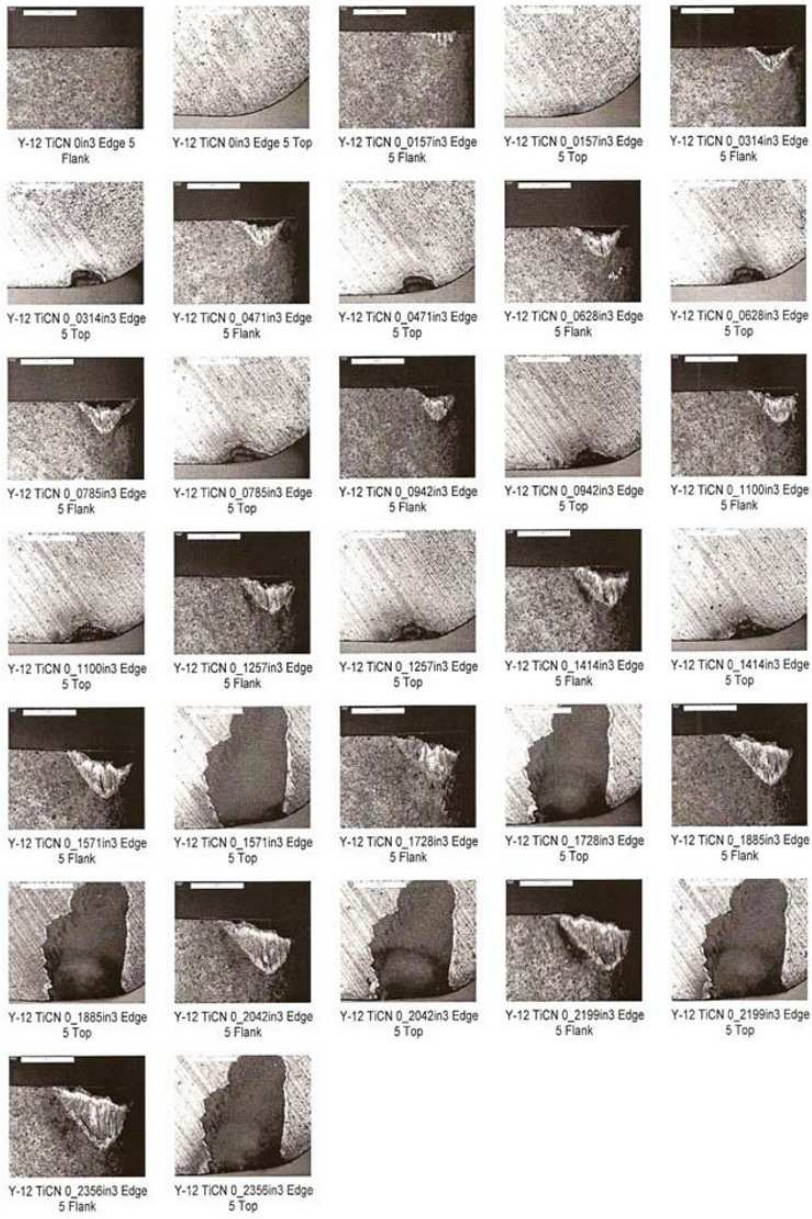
TiCN Tool Cutting Edge 5 machined at 158 RPM. 0 – 0.2356 in³ workpiece removed
